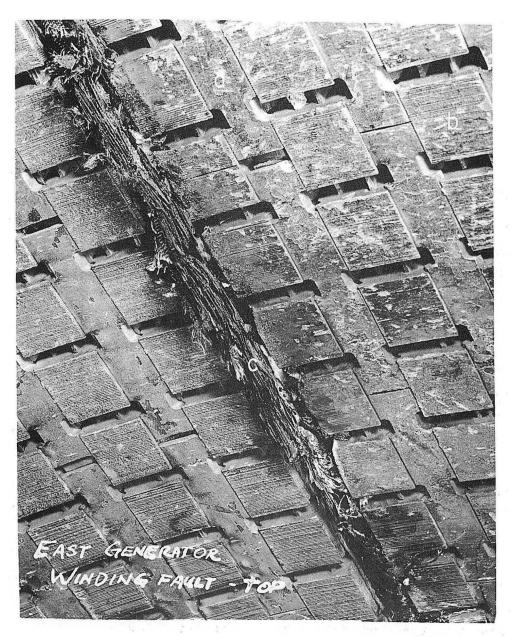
Damaged stator winding, east generator: a, stator winding keeper wedges; b, stator; c, damaged stator winding.
